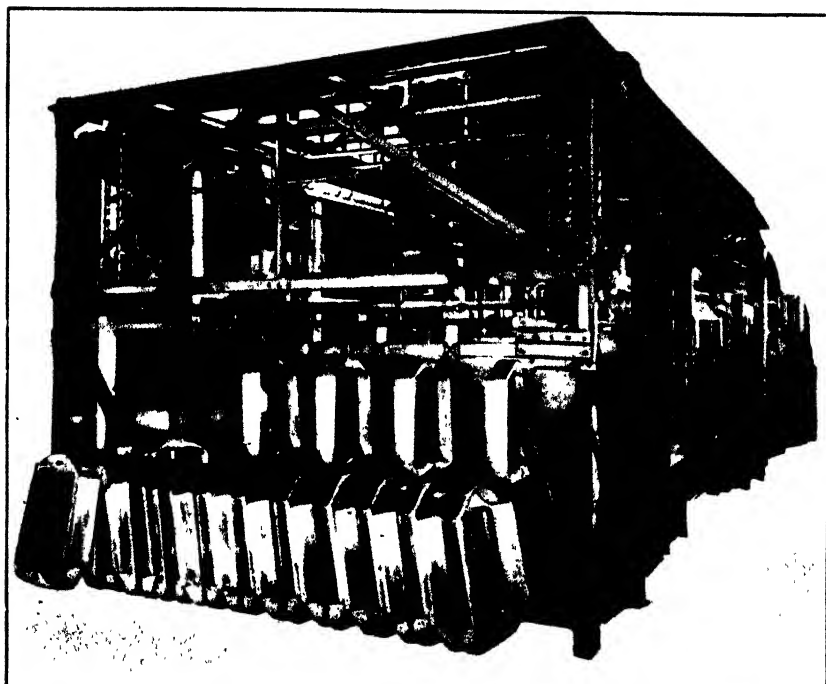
Loading end of a full automatic plating machine. (Courtesy The Meeker Company.)
